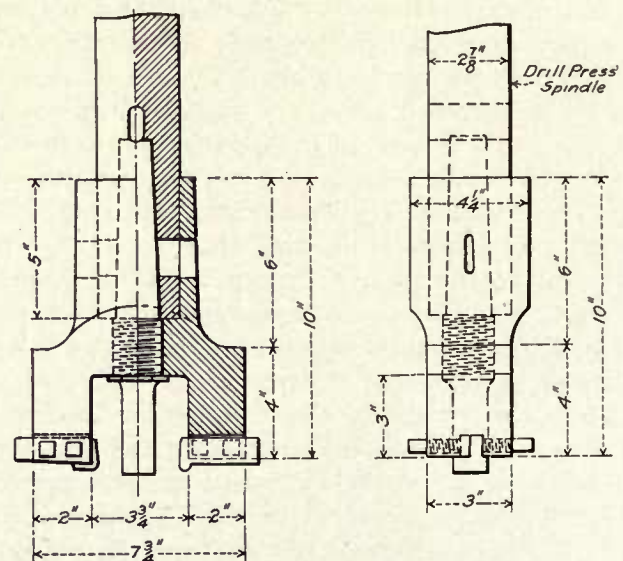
Tool for Machining the Outside of Solid Rod Cups.
